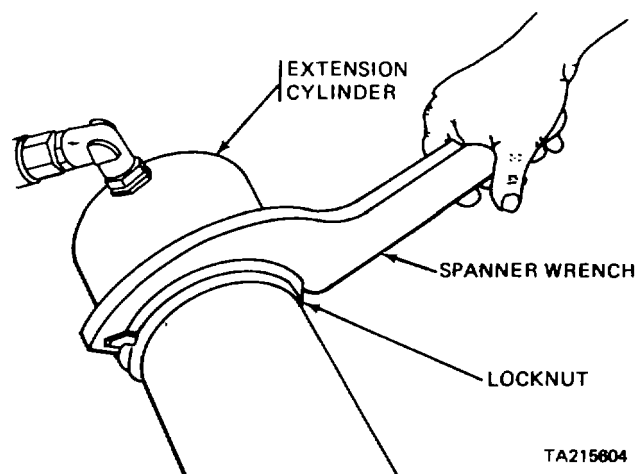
Extension Cylinder-Bearing Locknut Removal Using Spanner Wrench
